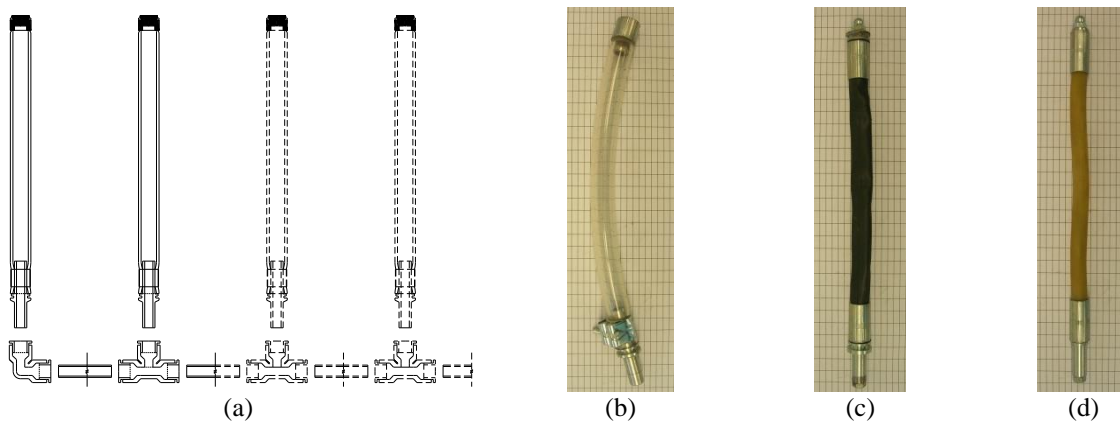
Tube-jack Prototypes: (a) Tube-jack basic design; (b) PVC tube-jacks; (c) rubber tube-jacks; and (d) latex tube-jacks
